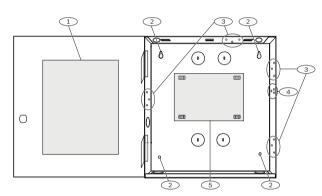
Enclosure and control panel mounting (B10 shown)
